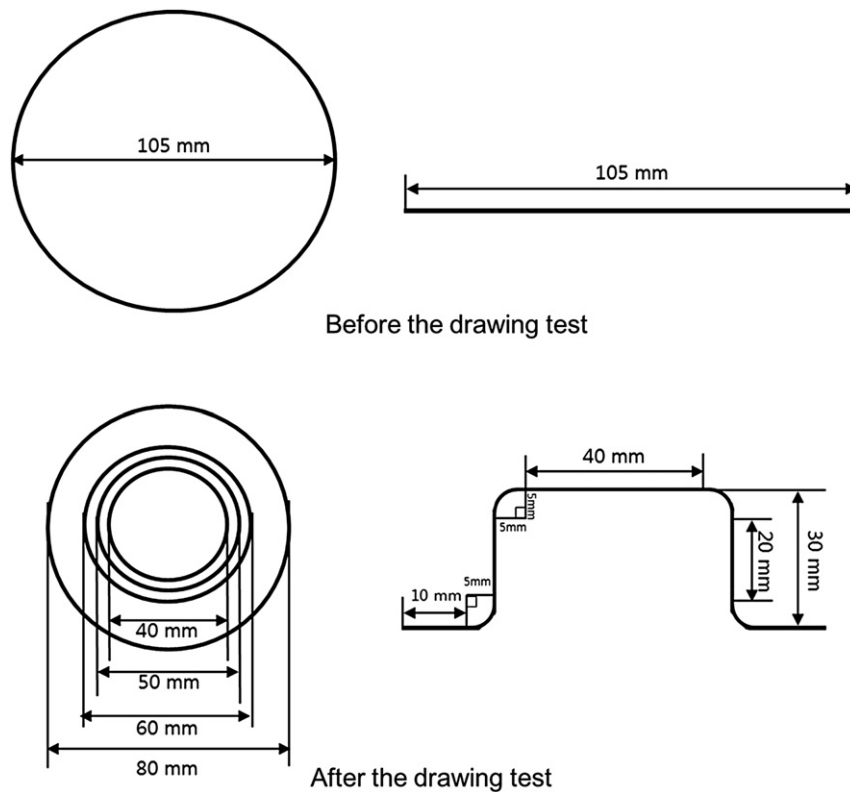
Schematic diagram of samples in cylindrical drawing test.
